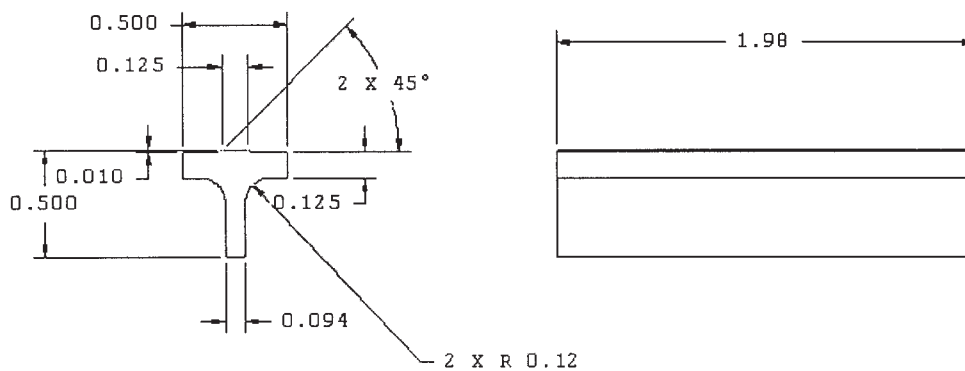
AWS ultrasonic welding specimen 2.
